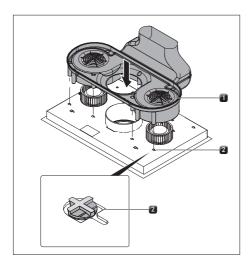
Inserting the airflow assembly on the cooktop base
